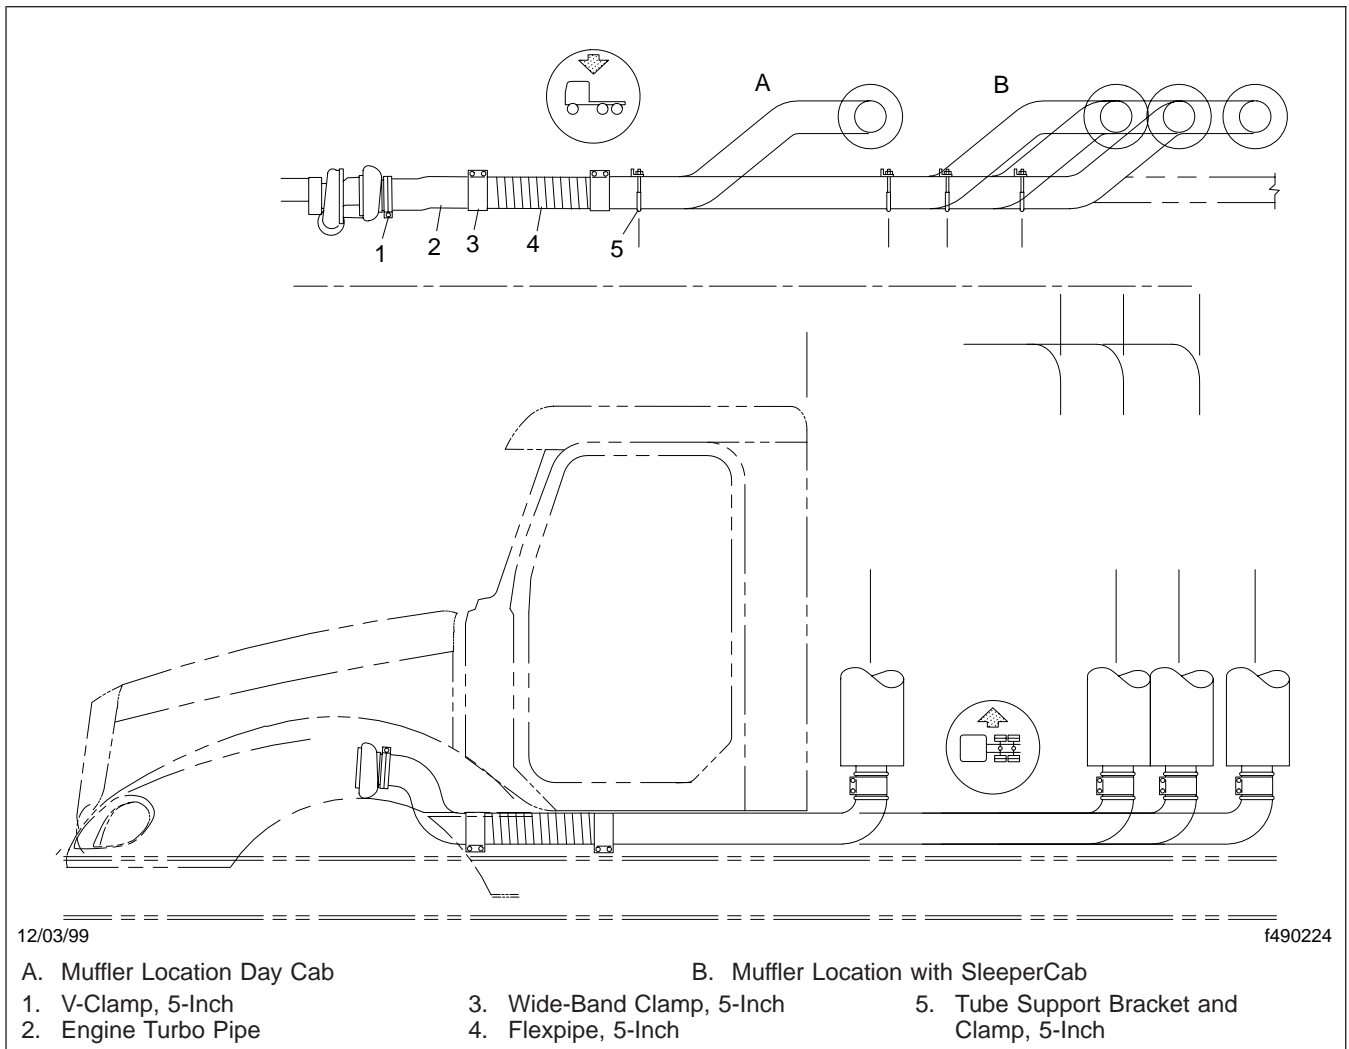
, Exhaust Piping for Single Stationary Outboard-Mounted Muffler
